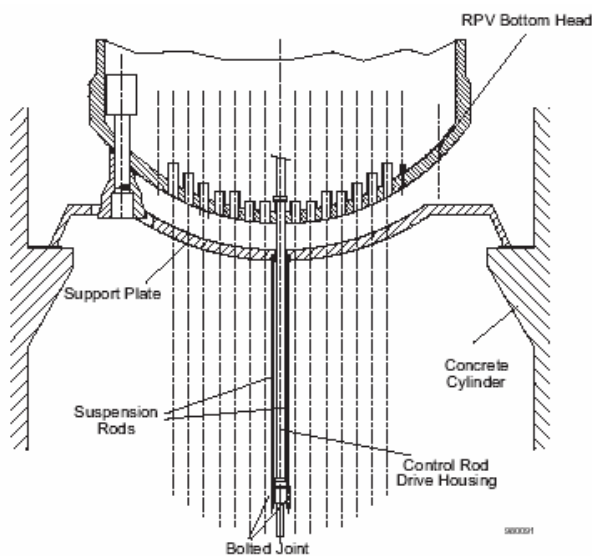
SWR 1000 Design for retention of control rod drive housing and instrumentation assemblies by 70 t support plate below the vessel – there are large enough gaps to let cooling water through
